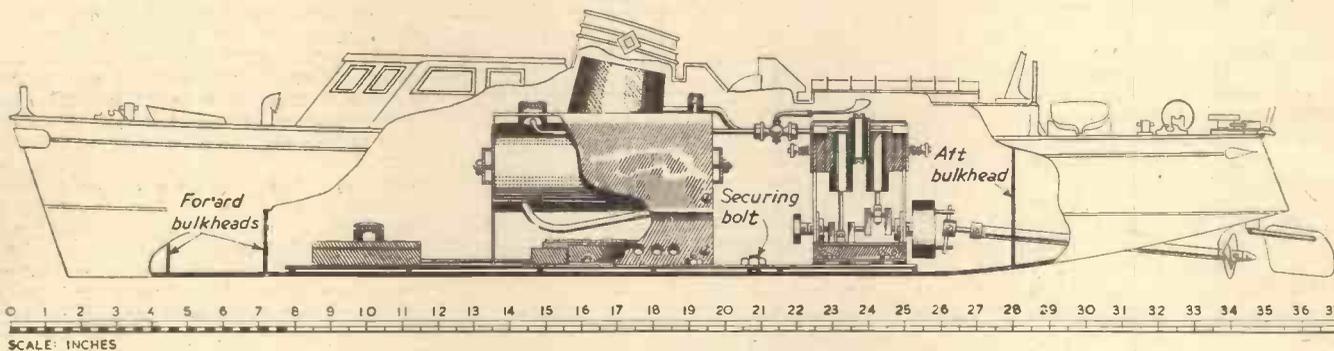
Part sectional side elevation showing the boiler and engine.
